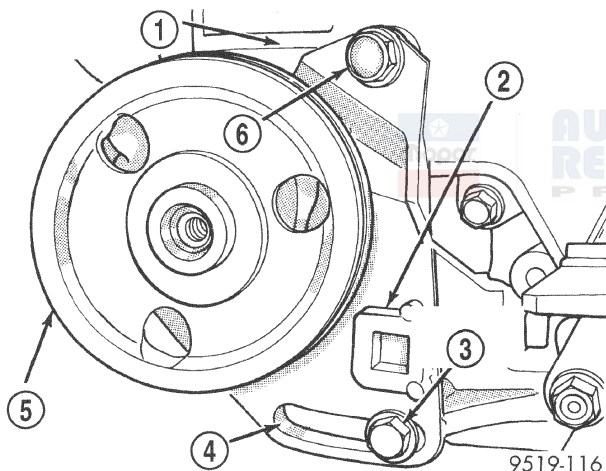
Power Steering Pump Rear Mounting Bolt
